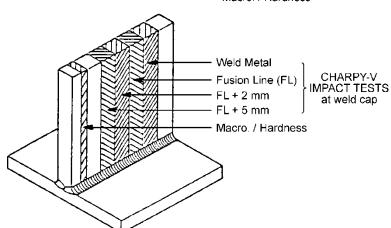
Full penetration groove welds on plates (T-joint or Y-joint)
